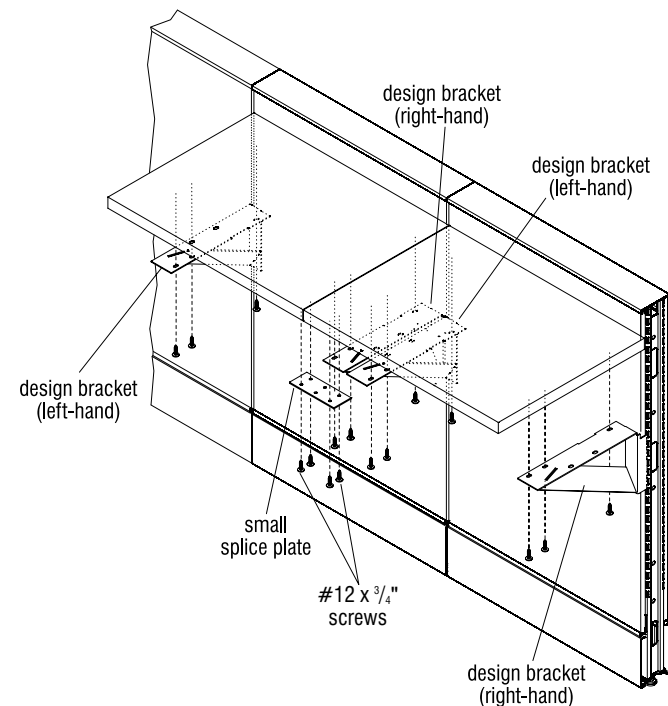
Design Bracket with 18" Worksurface with 74P Edge
